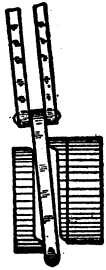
Contacts out of alignment. A flat .020" gauge spaces contacts .030" to .040"
